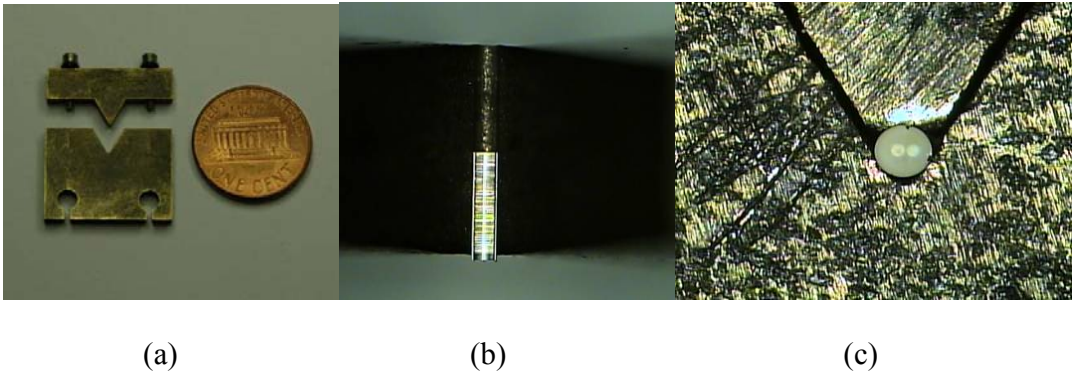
Designed lens holder: a) side view, b) top view with a GRIN lens, c) side view of a GRIN lens loaded in the lens holder
